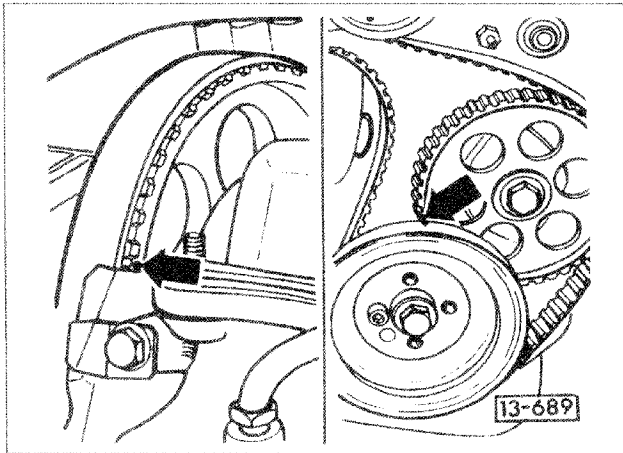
Drive belt timing marks (arrows) for camshaft and intermediate shaft on 8-valve engines.
